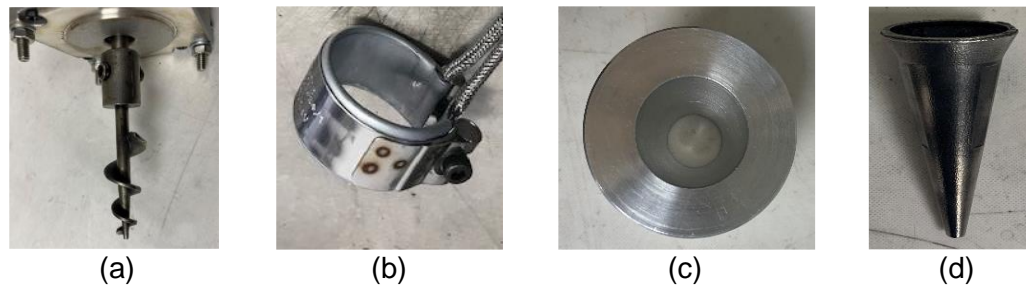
Images of extruder components: (a) auger screw attached to stepper motor, (b) band heater, (c) aluminium collar, and (d) funnel-shaped nozzle.
